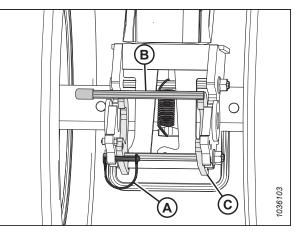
Left Transport Wheels – Rotation Lock Latch Disengaged
